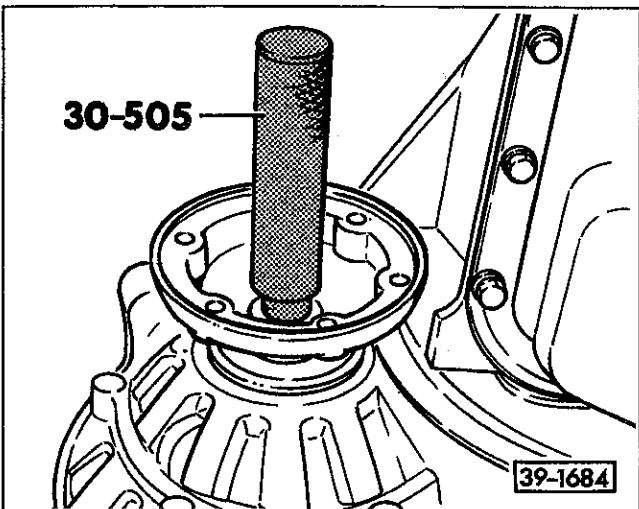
Drive flange being installed using Volkswagen special tool no. 30-505.
